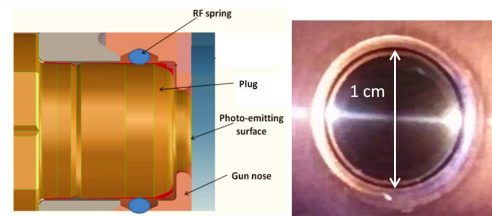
Left: CAD side view of the molybdenum cathode plug inserted in the gun nose. Right: picture showing the plug tip inside the gun viewed from the beam exit pipe.
